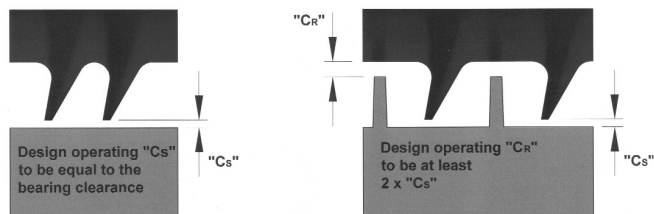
Drawing Illustrating Thermoplastic Seal Clearance Guidelines.
